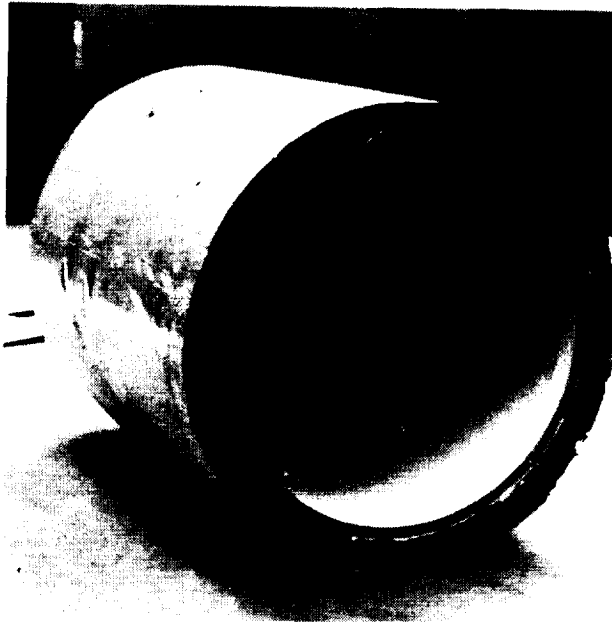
Open End of Inner Cylinder of Bio-sample Freezer after MLI was Trimmed
